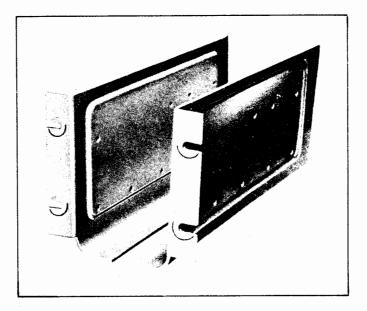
Gusset, Rack Mounts for Frequency Shift Converter CV-60/URR
